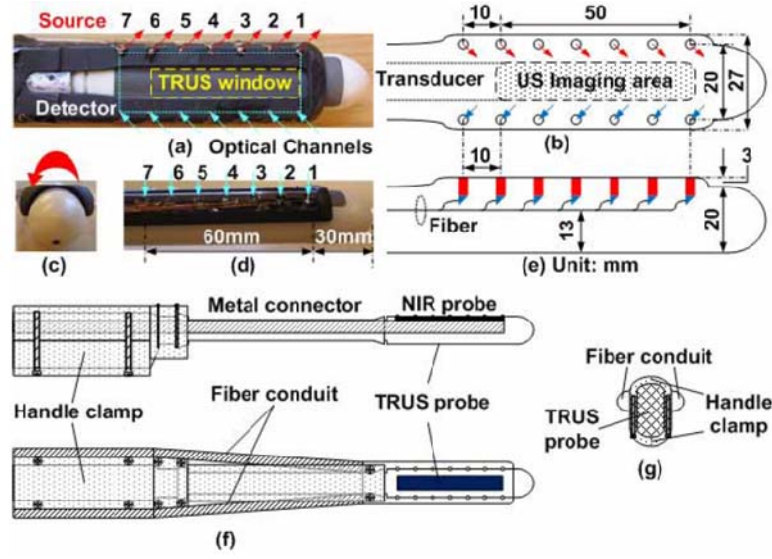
The combined trans-rectal NIR/US probe: (a) top-view; (b) top-view dimension; (c) front-view; (d) side-view; (e) side-view dimension; (f) side and top views of the NIR/US alignment method; (g) rear-view of the NIR/US alignment method.
